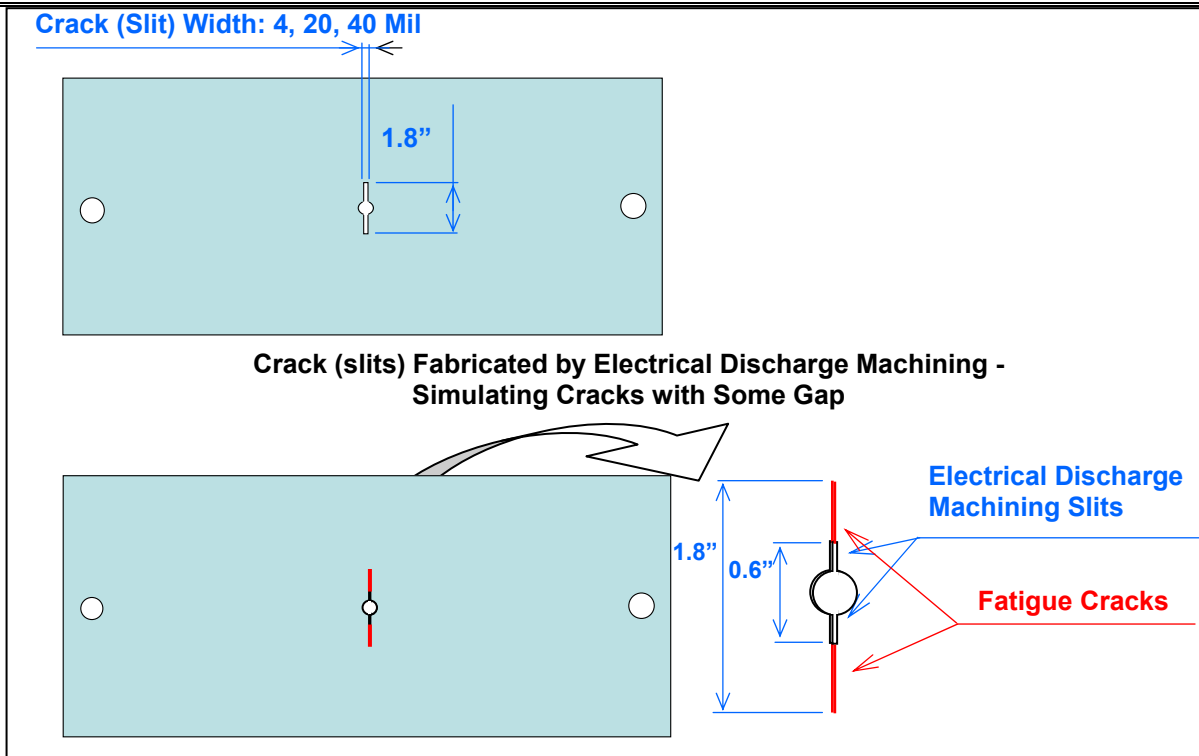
Crack Fabricated by Machining Simulating Cracks with Some Gap and Fatigue Crack actually Fabricated by Tension Test Apparatus; Crack has No Width and Surfaces May Touch Each Other
